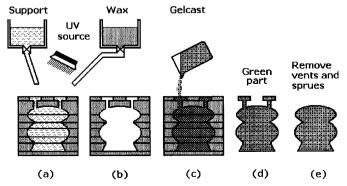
Mold Shape Deposition Manufacturing (MSDM): Casting molds can be formed in successive layers: Wax for the
